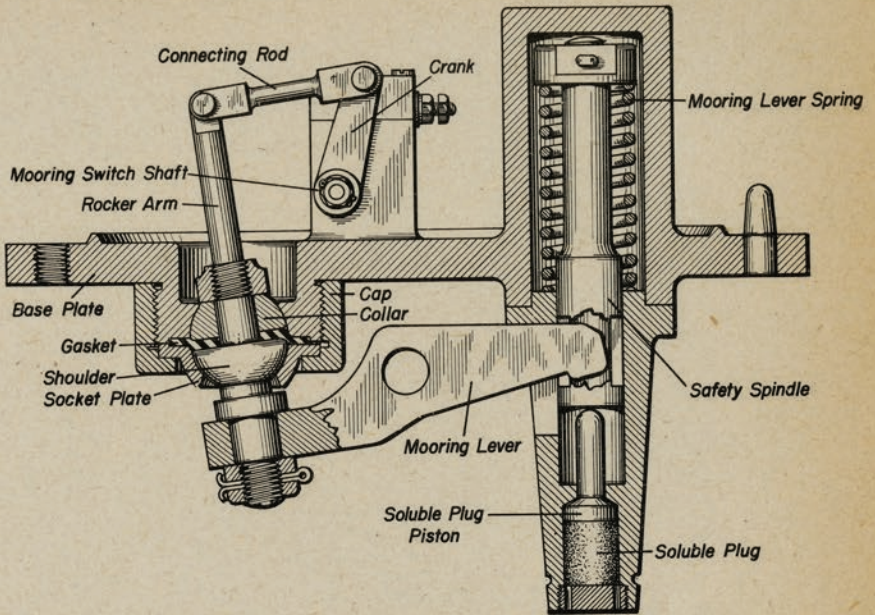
Mine Type JJ, Base Plate, Sectional View
